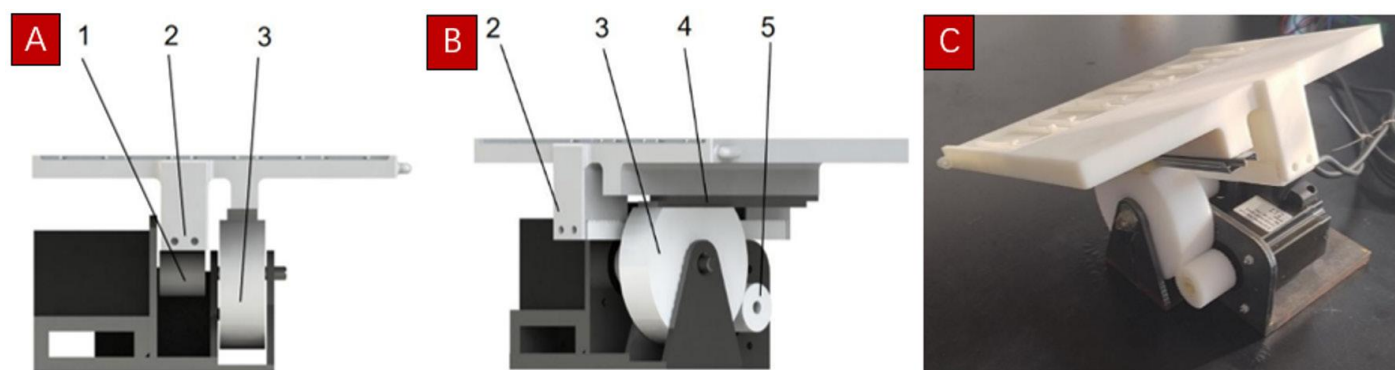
Structure of the smear carrier and its base. (A) Main view of the structure; (B) Side view of the structure; (C) Physical prototype of the structure. 1: gear 1, 2: rack fixedly connected below the carrier, 3: gear 3, 4: guideway, 5: gear.
